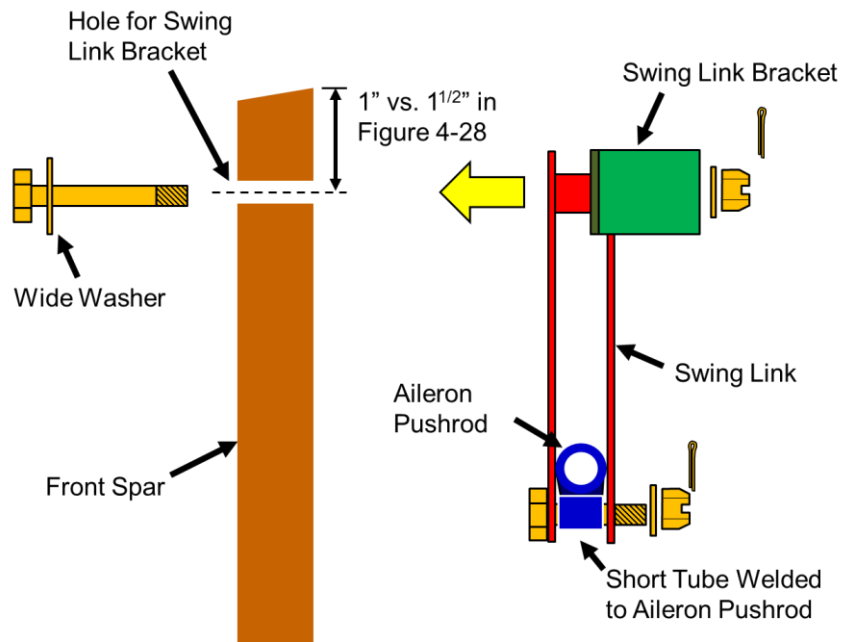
Cross-Sectional View of Aileron Pushrod and Swing Link
